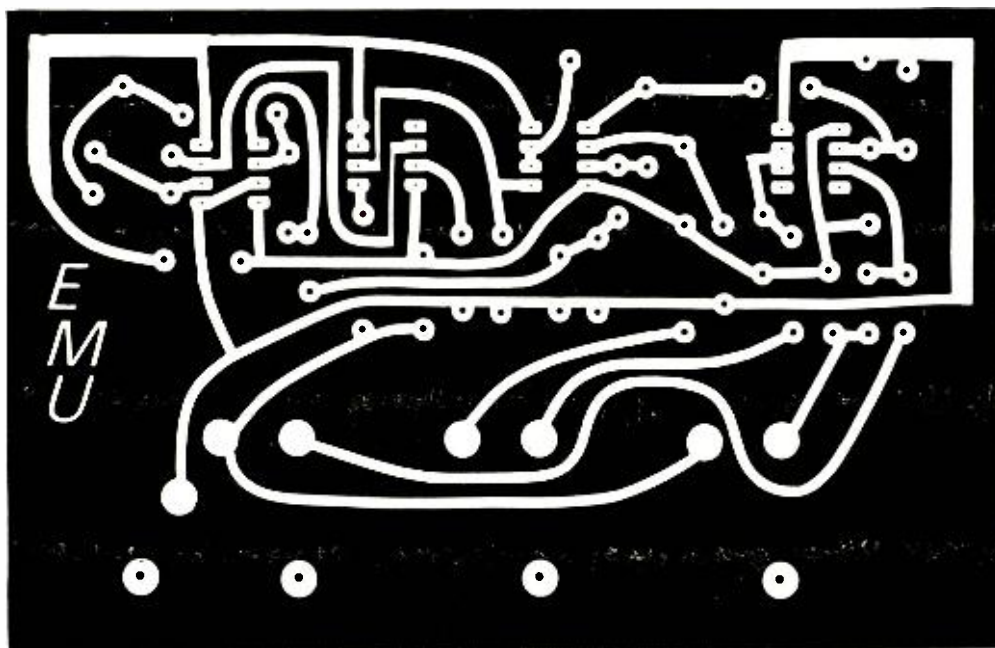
The actual-size etching and drilling guide for a suitable pc board is shown at left below. Component placement guide is at top.
